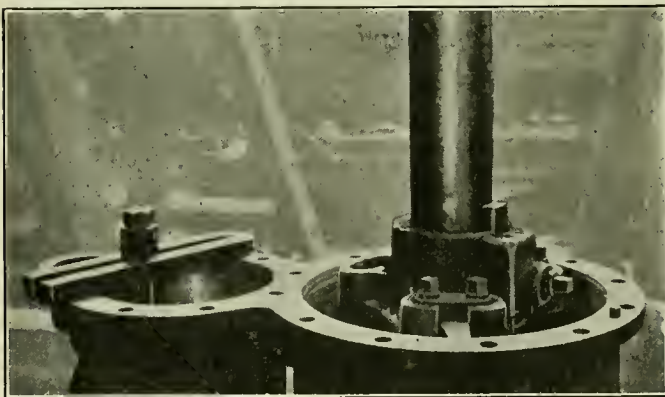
Adjustable Head Used in Boring Air Compressor Cylinders
